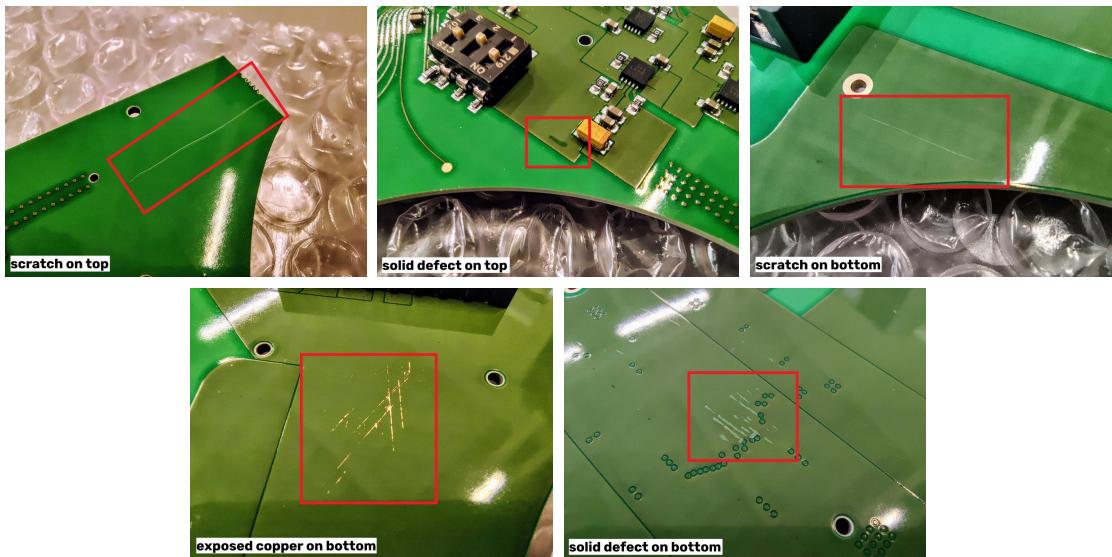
Examples of defects found during visual inspection of the FEBs (clockwise from top-left): scratch on top, solid defect on top, scratch on bottom, exposed copper on bottom, solid defect on bottom.
